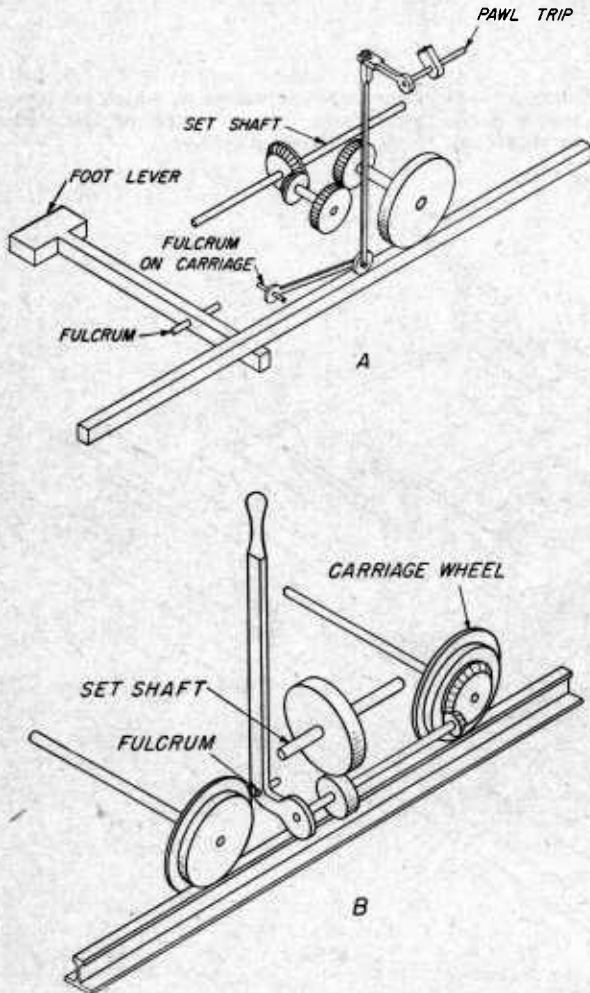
Power receders. A, Movable beam, friction-wheel type actuated by carriage gigback; foot lever brings moving beam in contact with friction wheel, which operates set shaft through gears, thus receding knees. B, Receding action obtained through geared carriage wheel when lever brings friction wheel in contact with bull wheel on set shaft.
